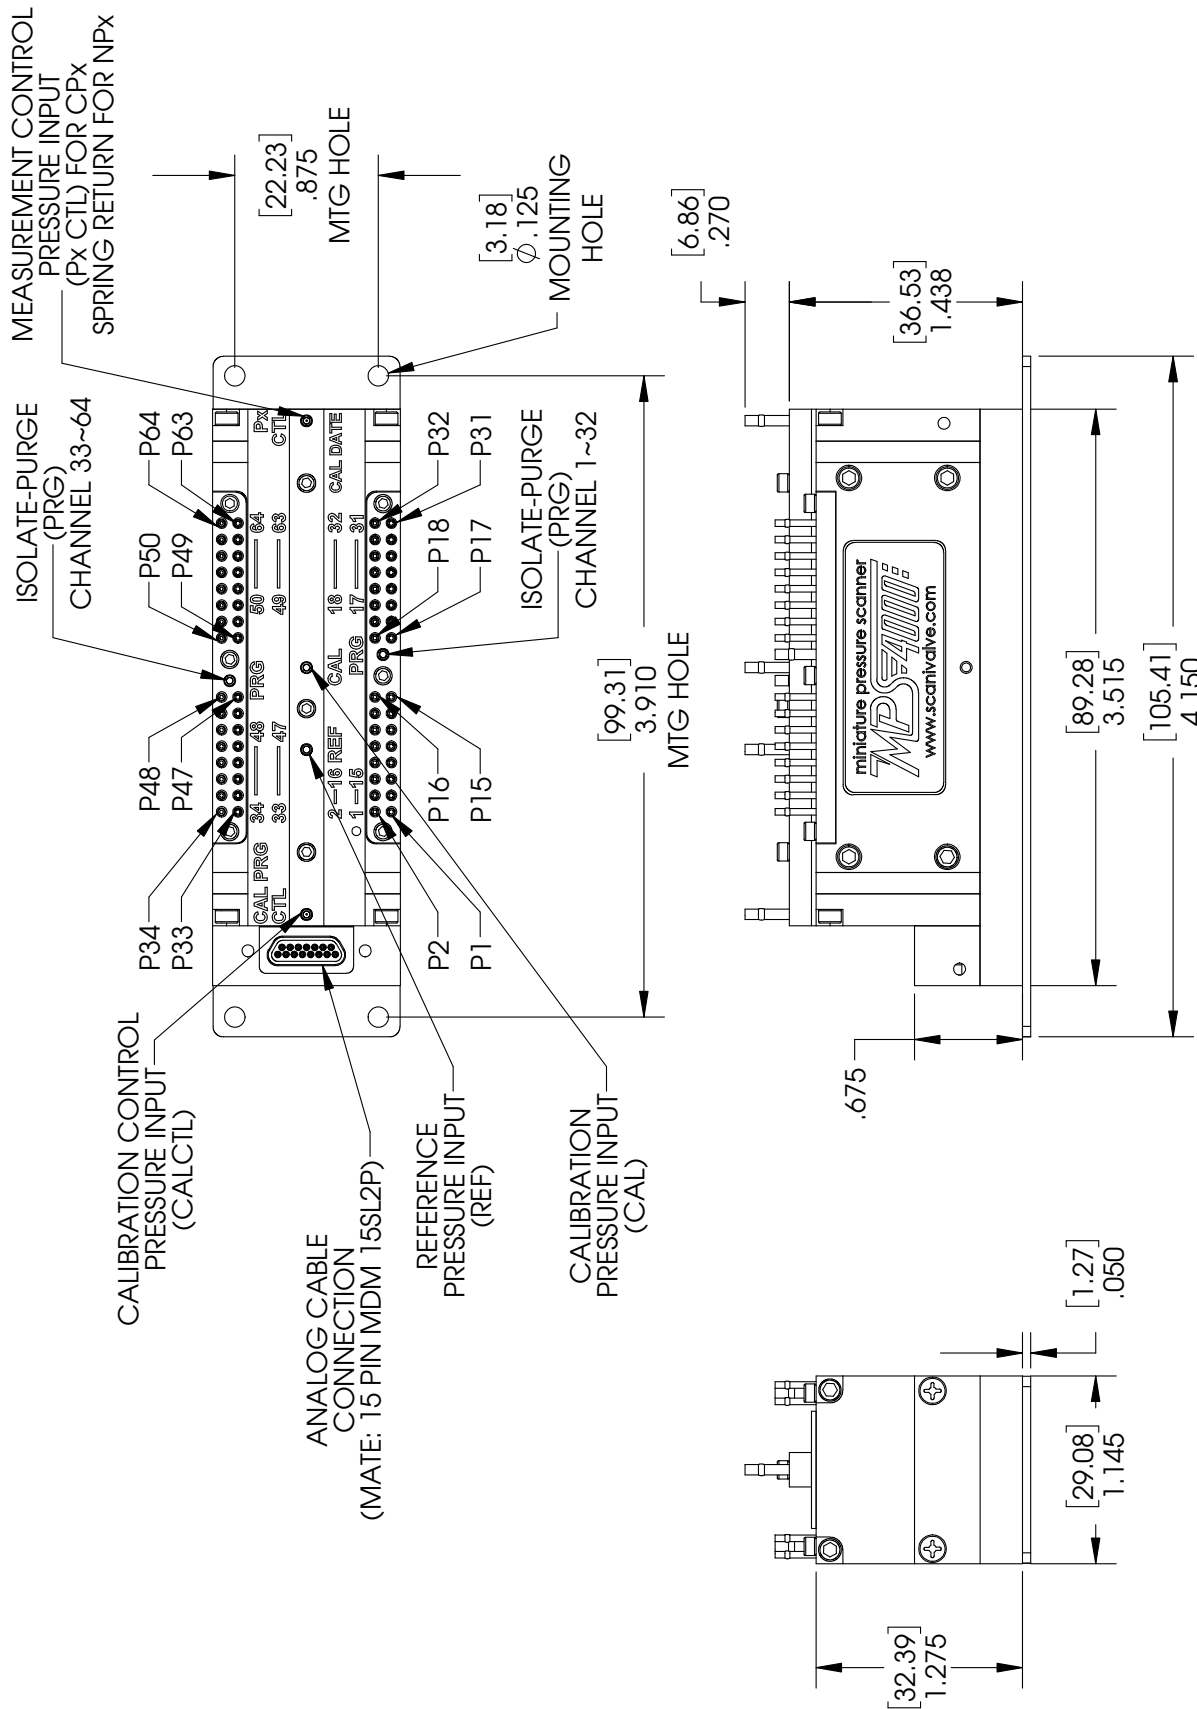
MPS4164 DIMENSIONS [INCHES(MM)]
